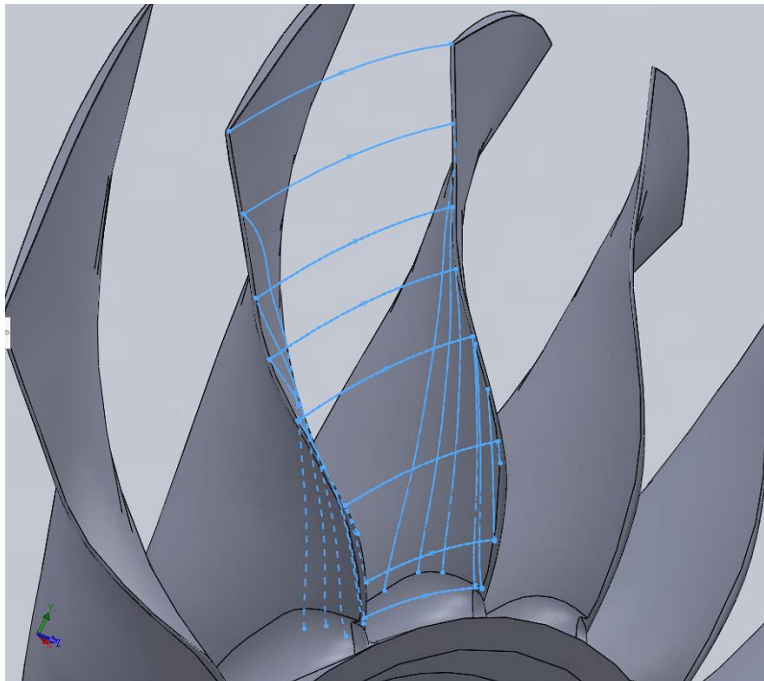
Technique used to construct trailing edge spline (4 of 4).
